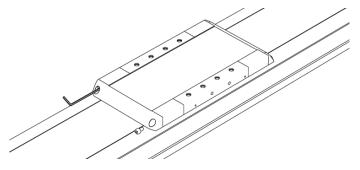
Mounting of cover strip in the cover strip clamp
